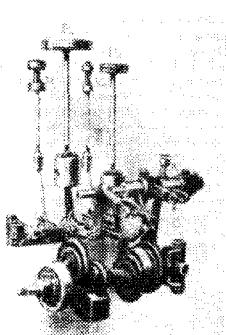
THE INSIDE PARTS OF THE WHITE STEAM ENGINE
